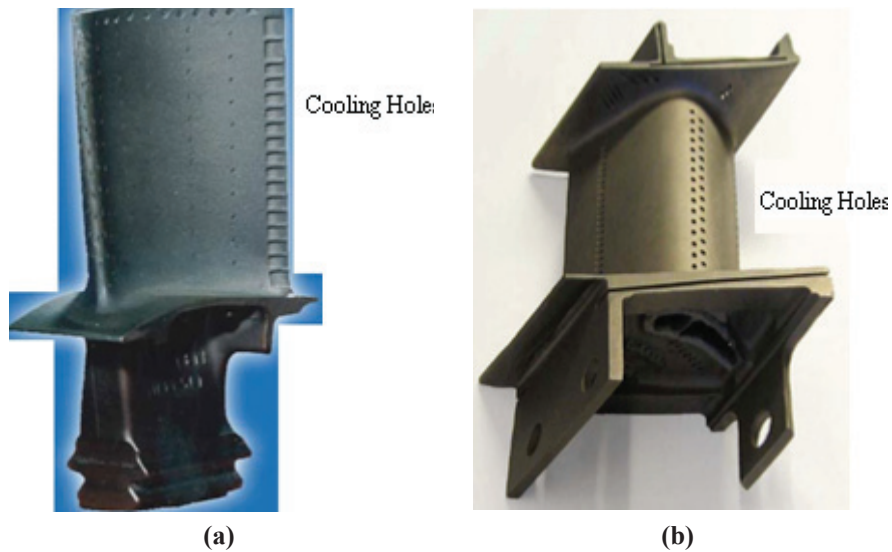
Airfoils of gas turbine engine with cooling holes: (a) Blade; and (b) Vane.
